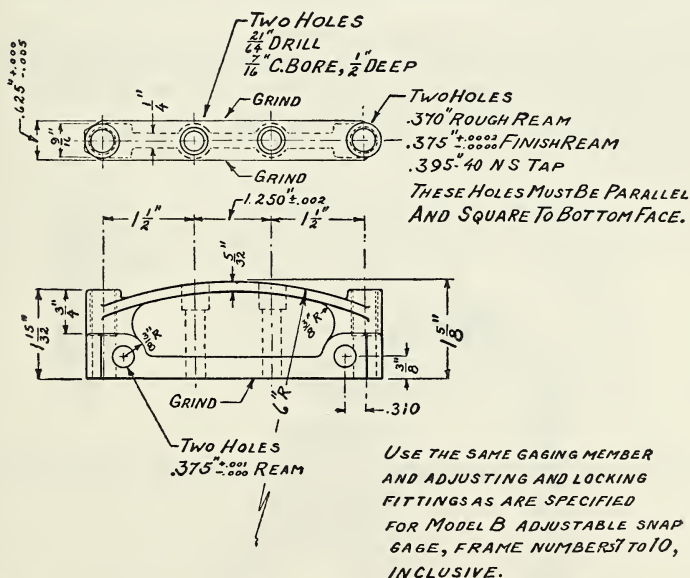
American Gage Design Standard adjustable length gage, detail of length gage head, double-sided model.
